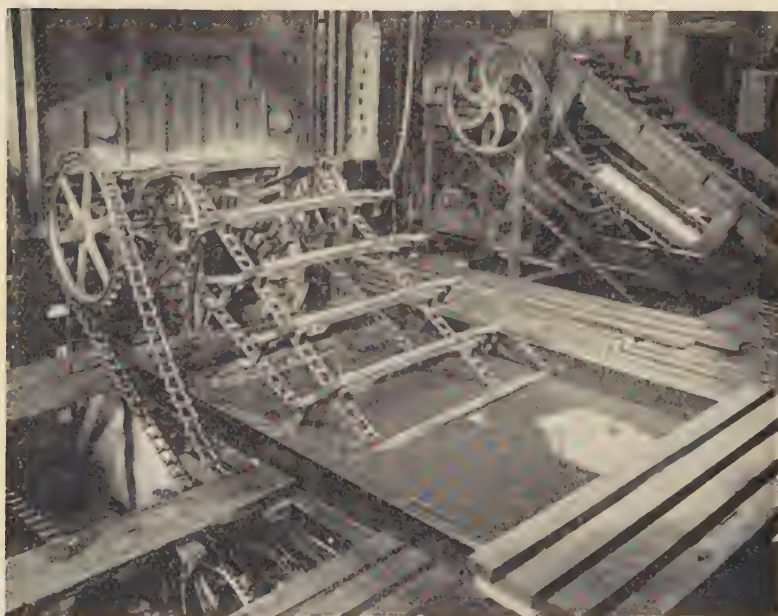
Auxiliary conveyors for delivering material to furnace conveyors.
